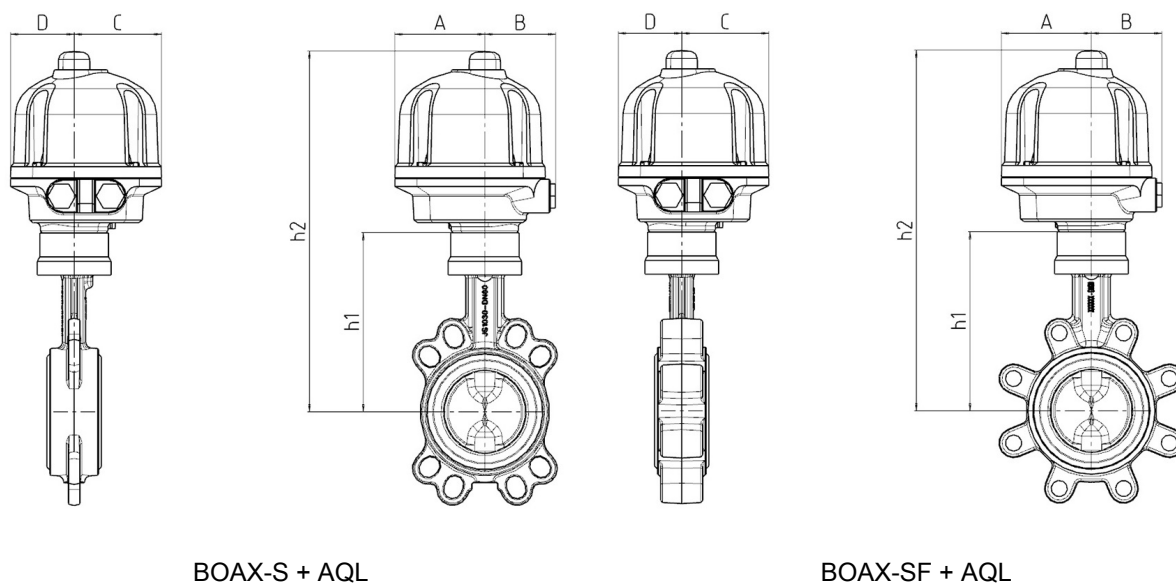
Sectional drawings of BOAX-S/SF with AQL
